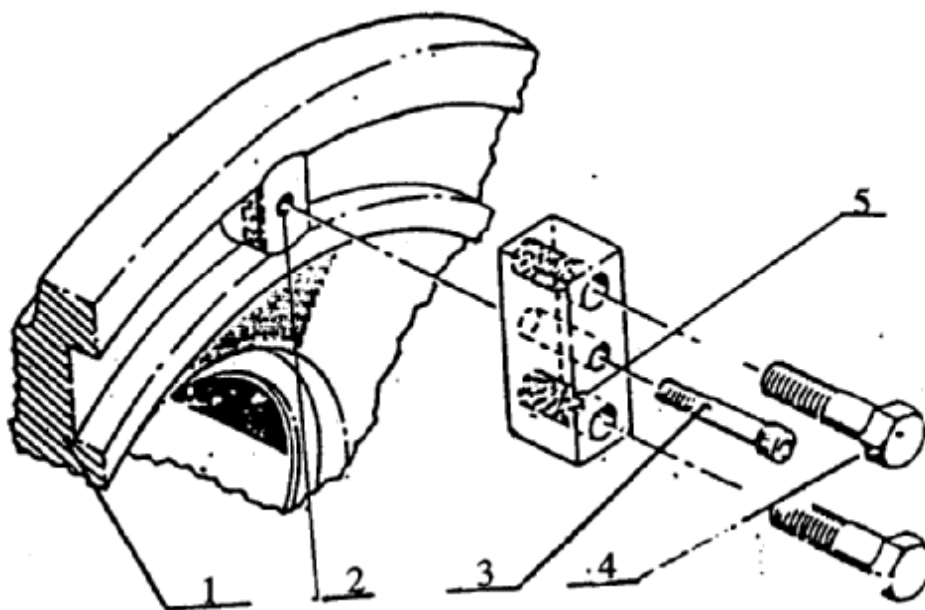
DISASSEMBLING AND ASSEMBLING OF DRIVING KEY
